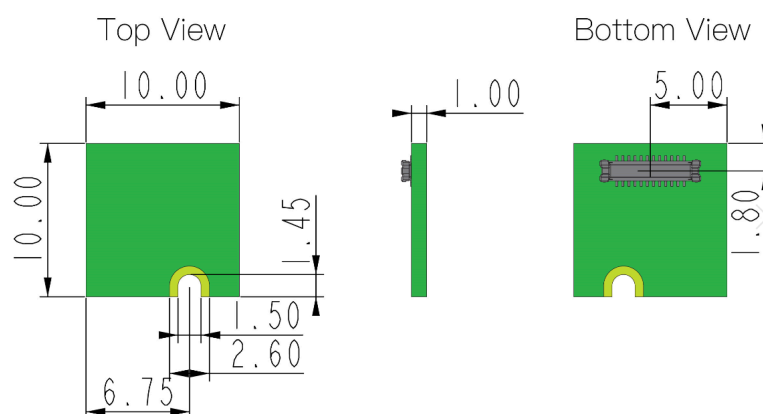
RAK1906 WisBlock Environmental Sensor mechanic dimensions
